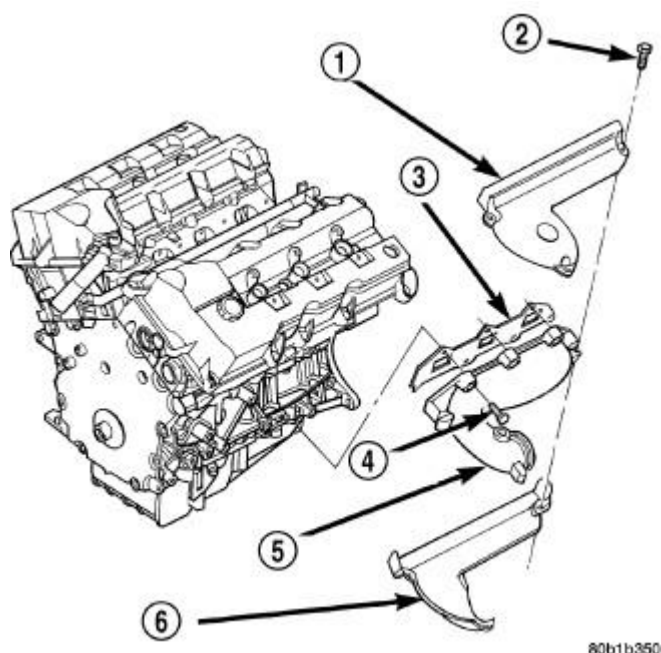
Exhaust Manifold Gasket & Heat Shields
